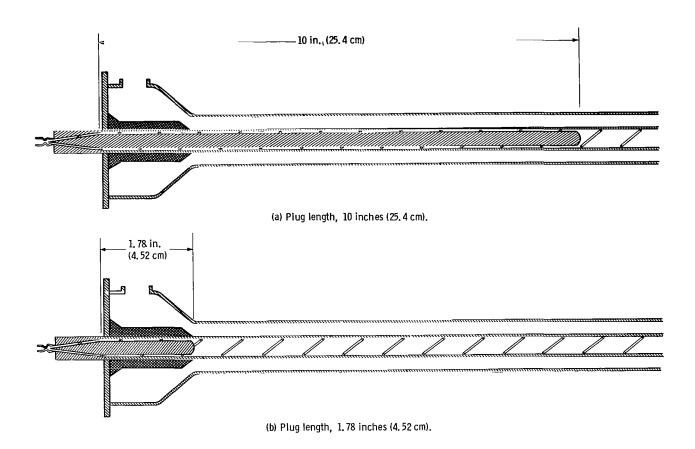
Inlet end of test section, showing inlet nozzle and two different-length inlet-region plugs.
